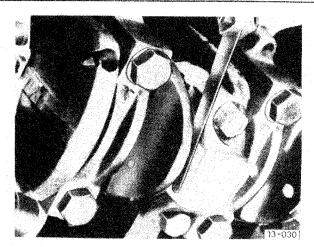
Connecting rod side clearance, checking wear limit: 0.37 mm (0.014 in)
